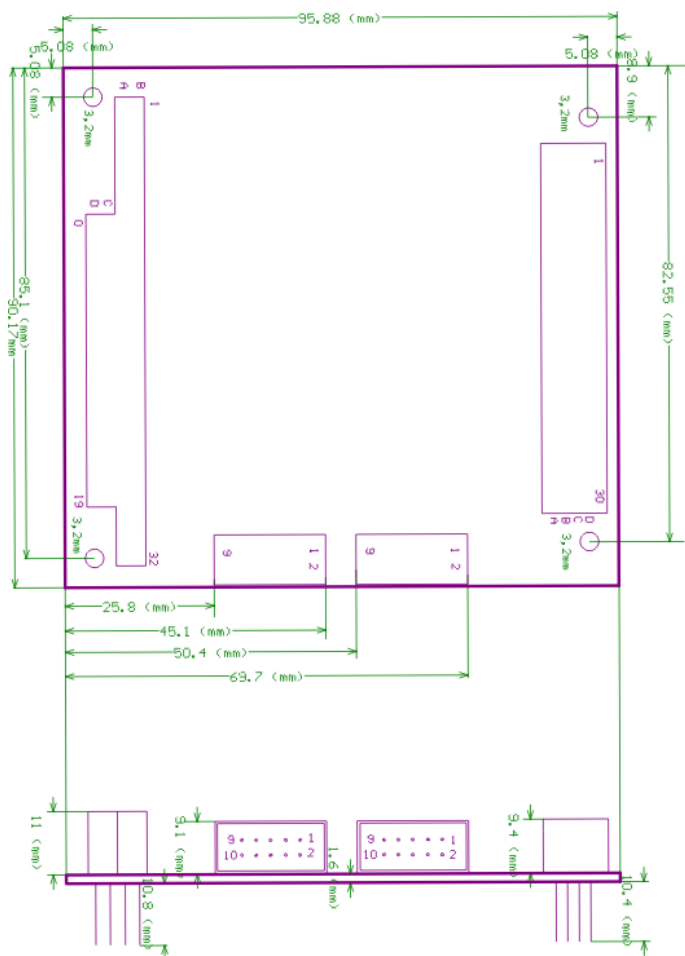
Dimension drawing PCAN-PC/104-Plus.
